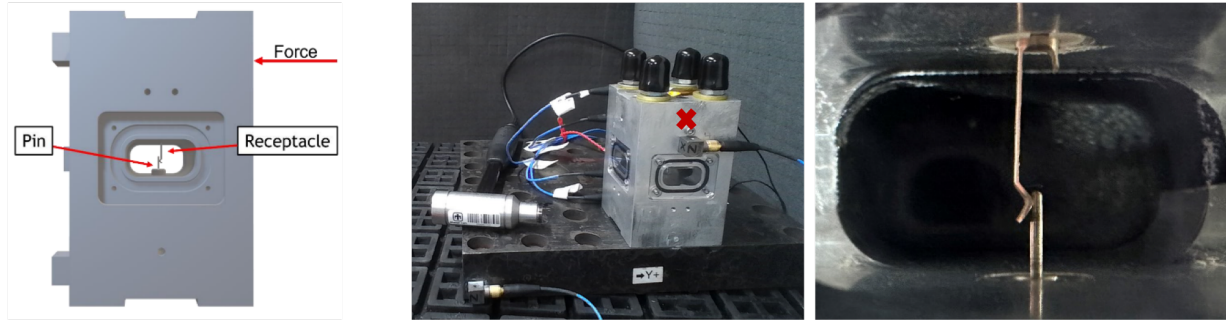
Test fixture used to study chatter (left), experimental setup (center), and close-up of pin and receptacle installed in the fixture (right)
